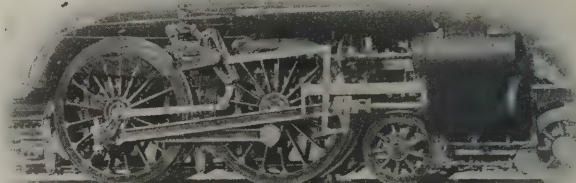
Atlantic Type Equipped with Walschaerts Gear
